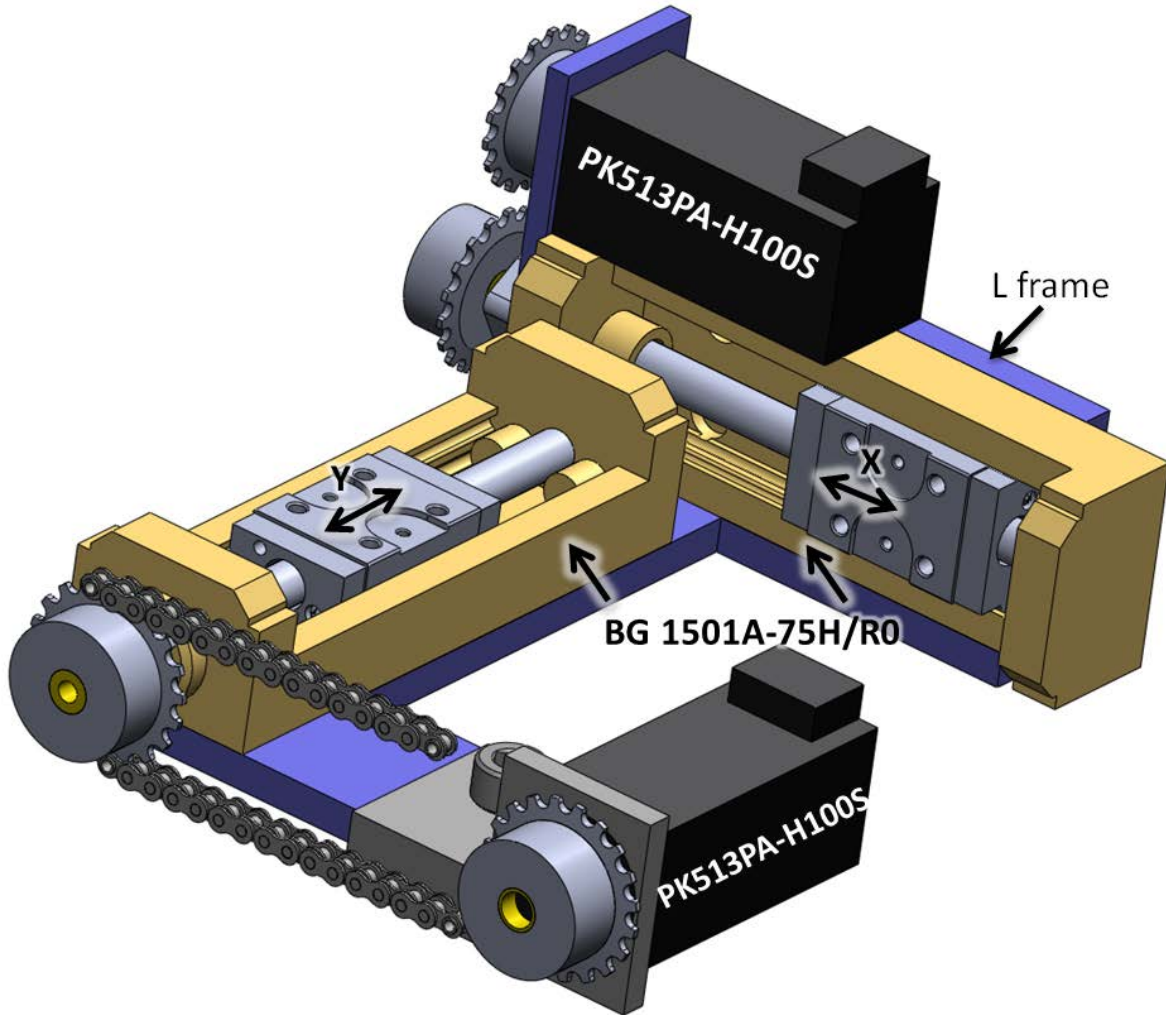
Schematic revealing chassis (L frame) of the micro-machining device.
